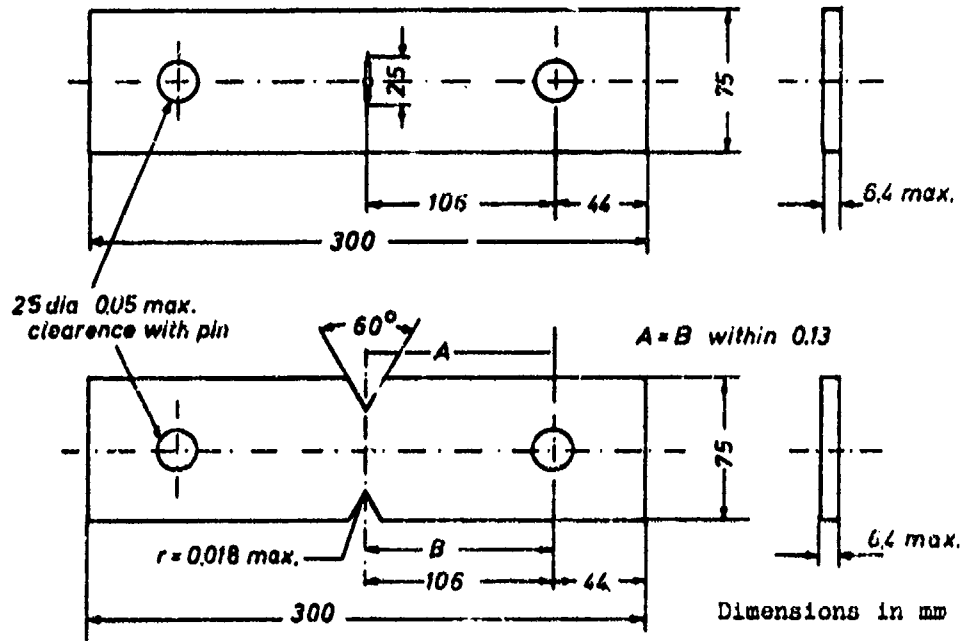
Fatigue center crack and machined sharp edge-notch specimen
